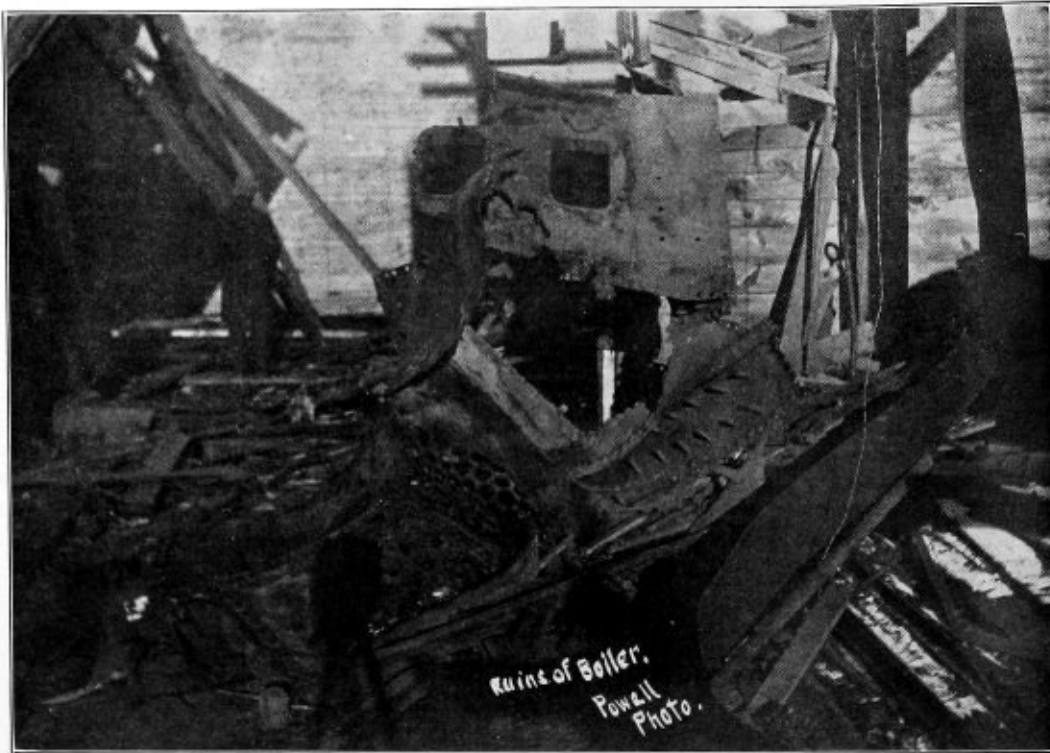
PARTIAL VIEW OF RUINS, SHOWING TUBE SHEET AND PART OF FIREBOX.
